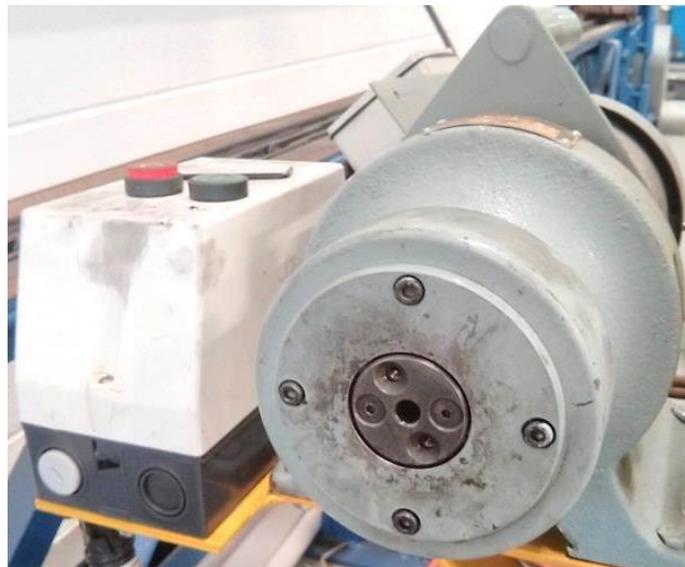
The small swaging machine to prepare the tip of the wire for drawing below 3 mm.
